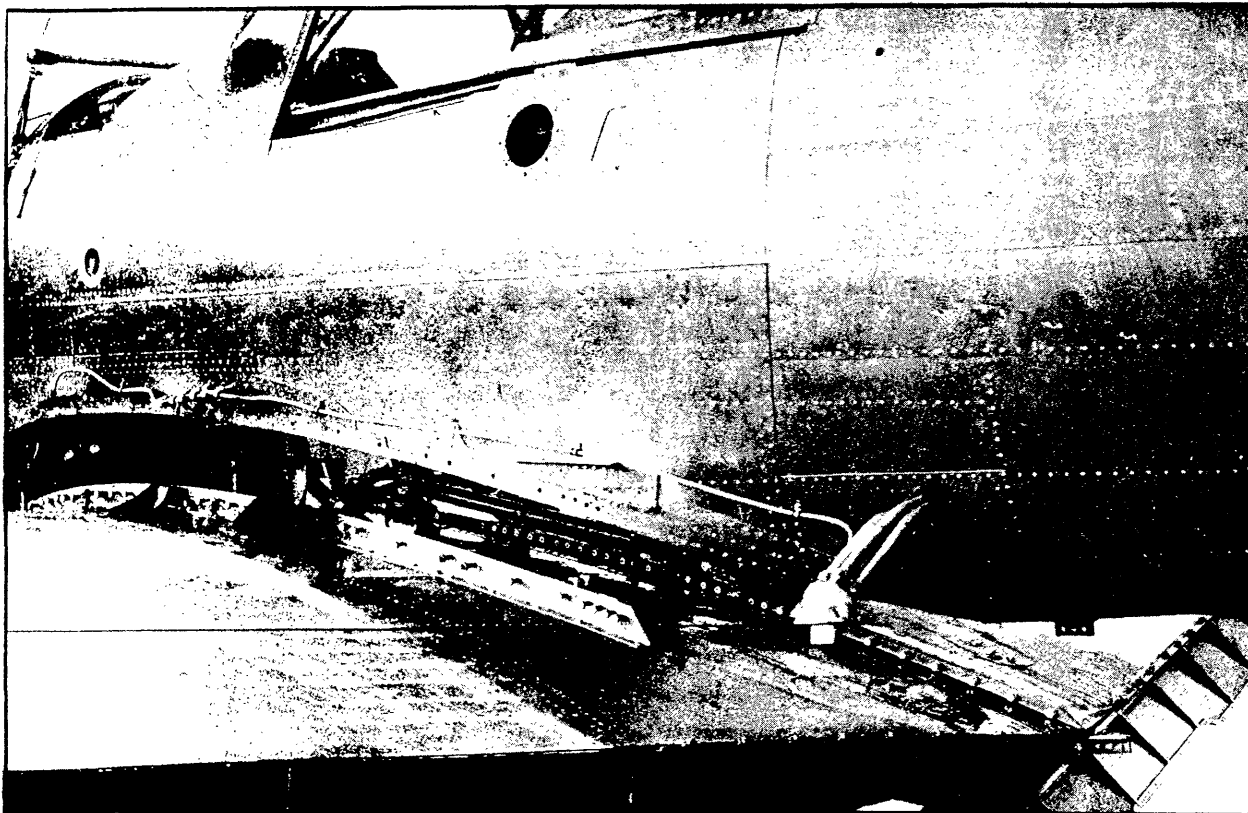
Wing to Fuselage Attachment - 3/4 Front View
